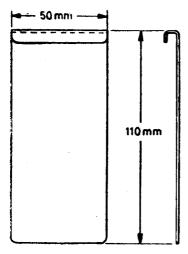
REMOVABLE SHUTTER FOR DRAUGHT SCREEN
